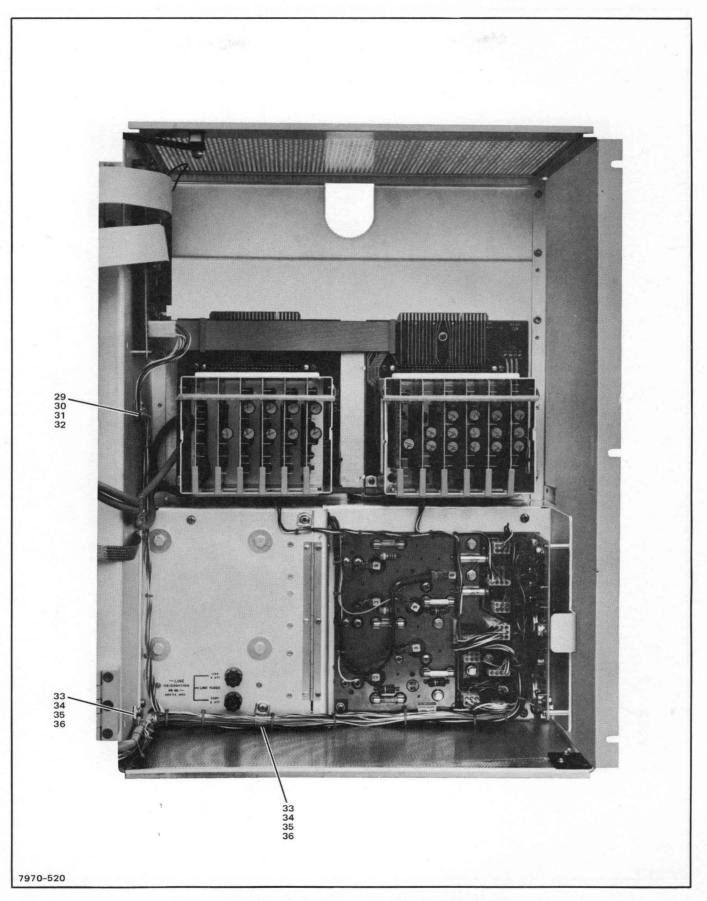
Transport Harness Assembly W2 (Sheet 2 of 2)
